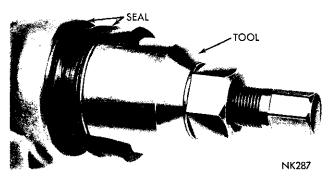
Removing Output Shaft Oil Seal (Chrysler Models)
